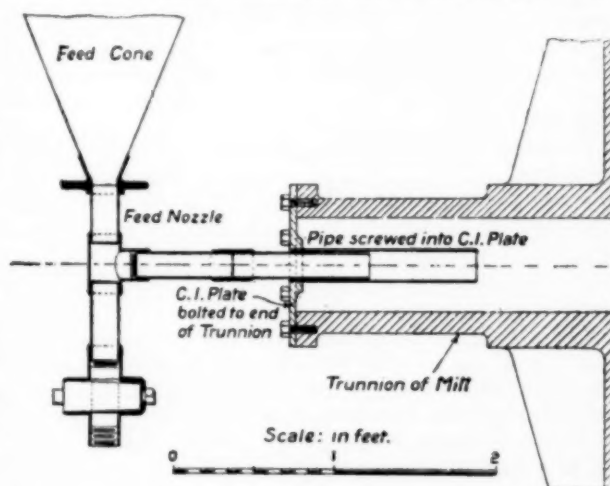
INJECTOR FOR FEEDING PULP TO TUBE MILL
